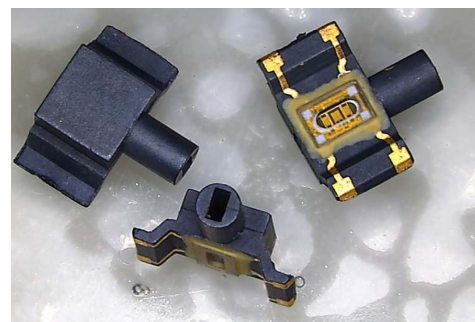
Photography of the final sensor system. The golden contacts are solderable, so that the system can be easily mounted onto a PCB.
